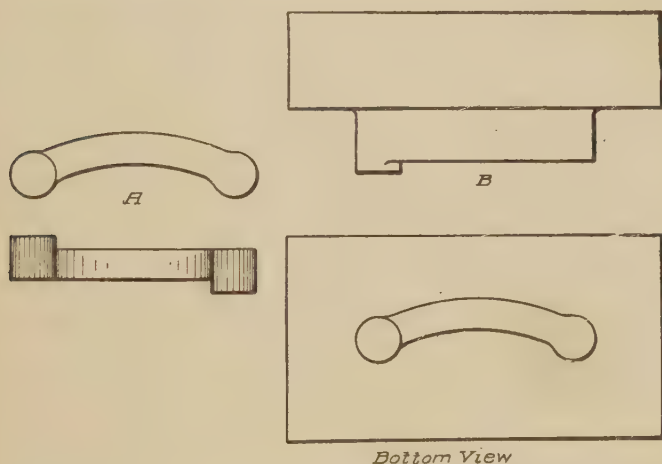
Hobbing Drop-Forging Dies. *A*—Piece to be forged; *B*—Hob
